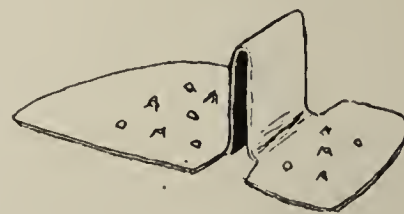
Shows the toe post ready to be inserted into the card board inner sole. Rough points on the upper and under surfaces of the base, which are made by punching holes with an awl, hold the toe post to both the inner sole of the shoe and the card board inner sole.
